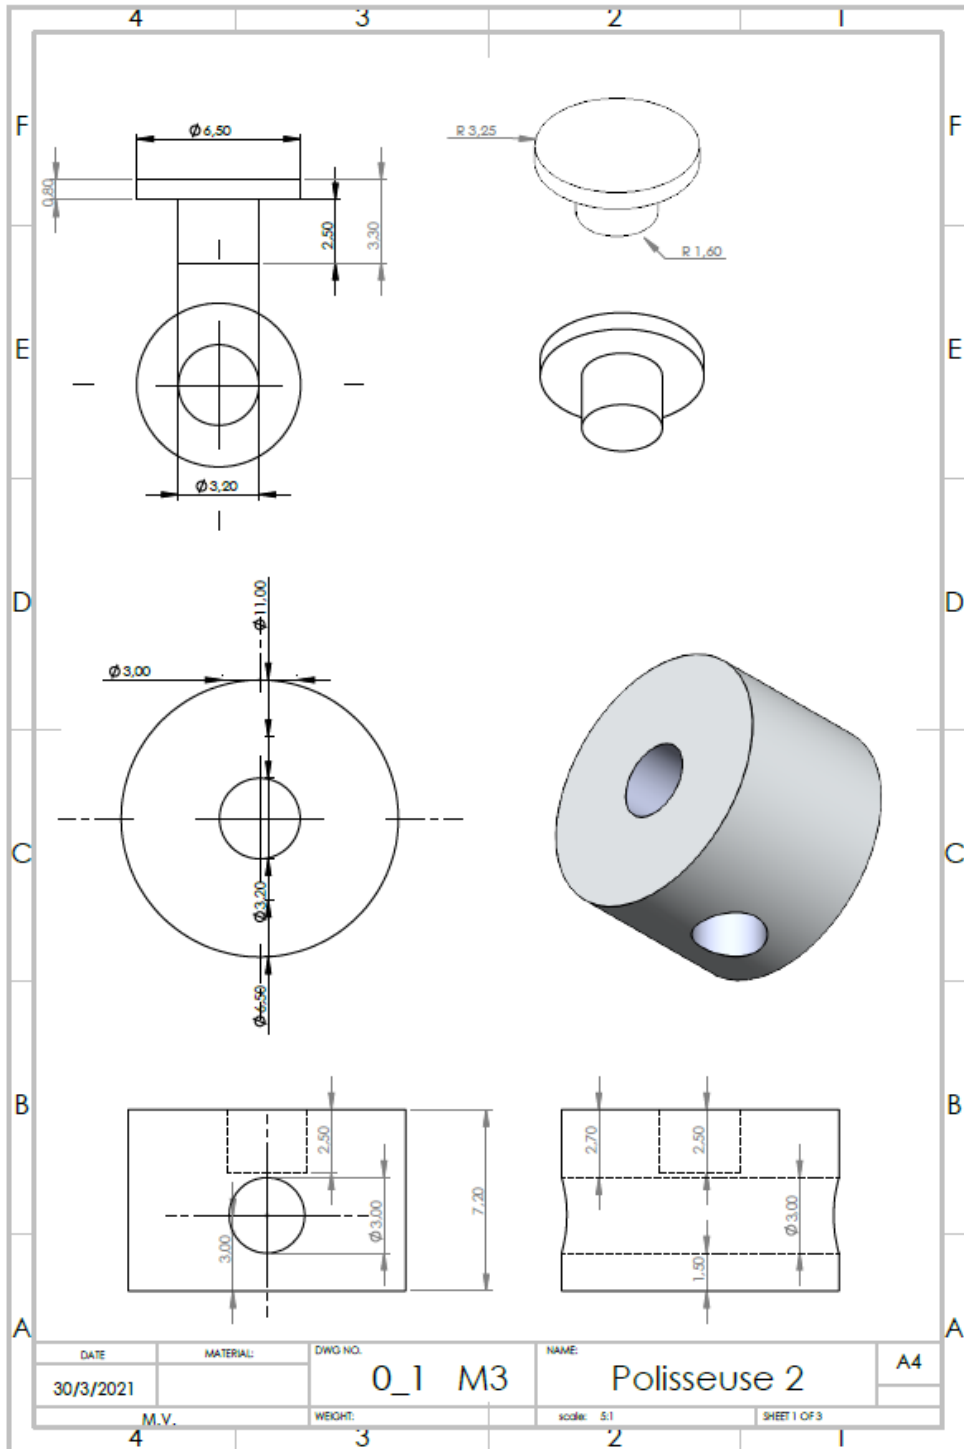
Drawing with dimensions of the custom designed specimen holder (1/3)
